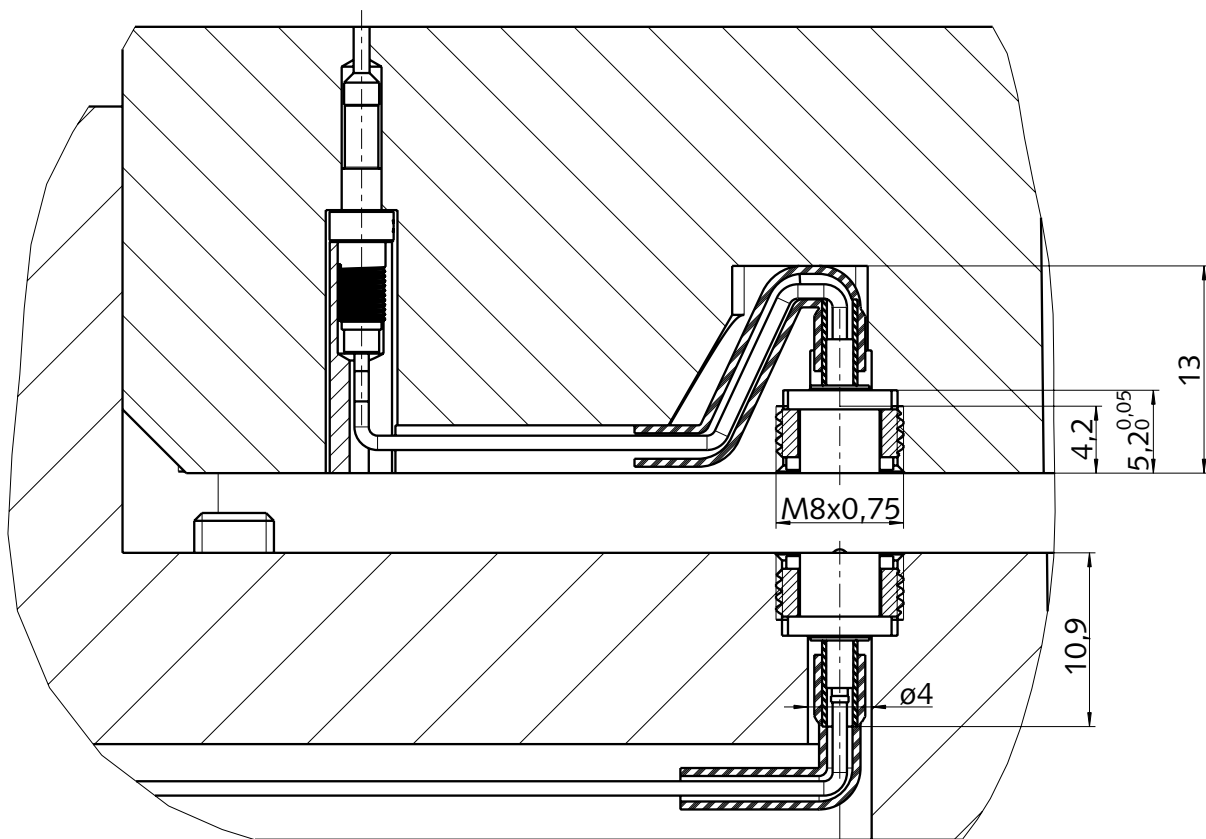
Installation example showing contact element Type 1712C0. Sensor Type 6183D... is connected to negative contact element Type 1712C2 in mold insert
